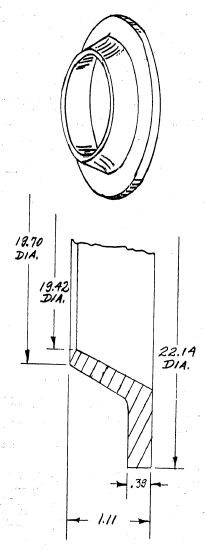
P/N 227596 - Front Flange, Turbine Stator Blade Support Assembly, Material Ti-670
